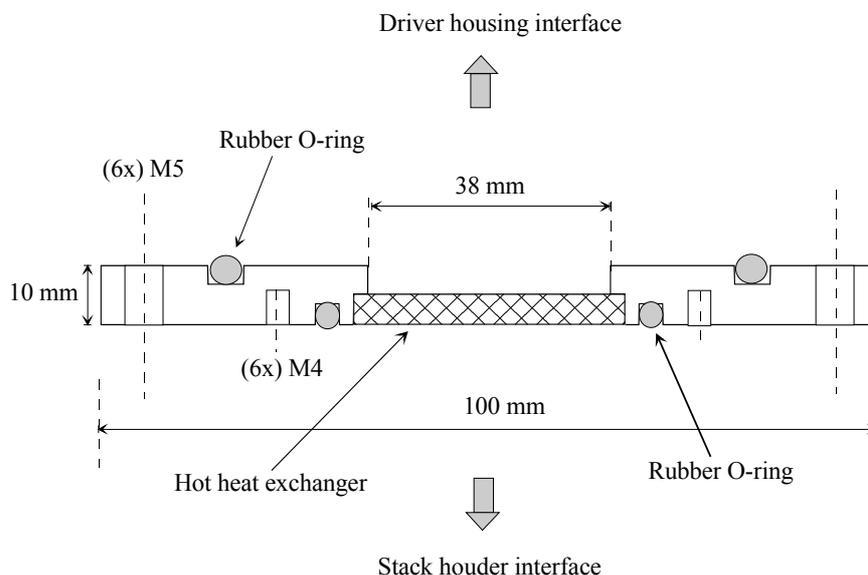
The hot heat exchanger copper flange. The spiralled hot heat exchanger is soldered in the copper flange. This flange serves also as interface to the stack holder and the driver housing.
